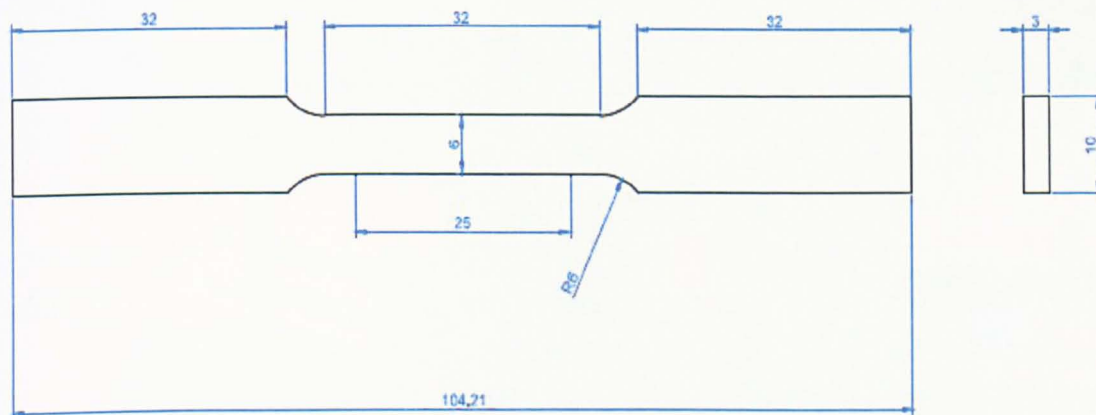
Room temperature tensile specimen geometry (drawing). Dimensions in mm.
